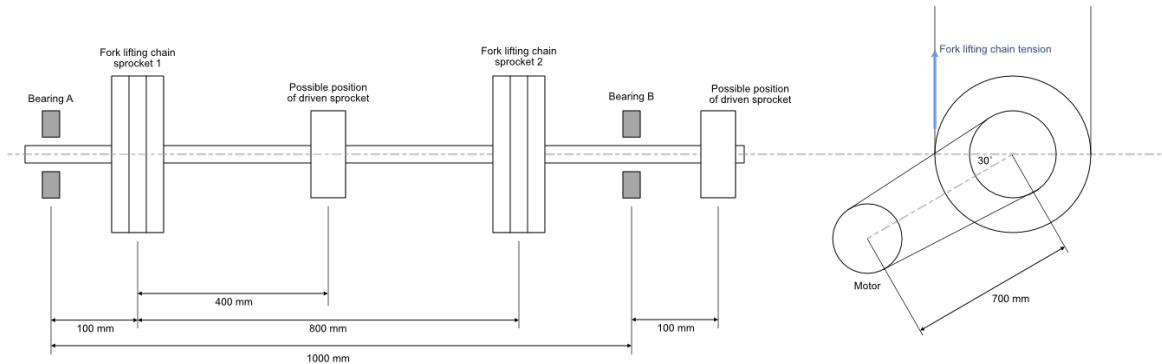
Side view and end view of sub-assembly, showing the location of the electric motor and the chains which lift the forks. The motor may be mounted with its shaft at either end, driving the shaft at either point 1 or point 2. Tolerances on the axial dimensions are ± 20 mm, tolerances on the shaft/motor centre distances are ± 50 mm.
